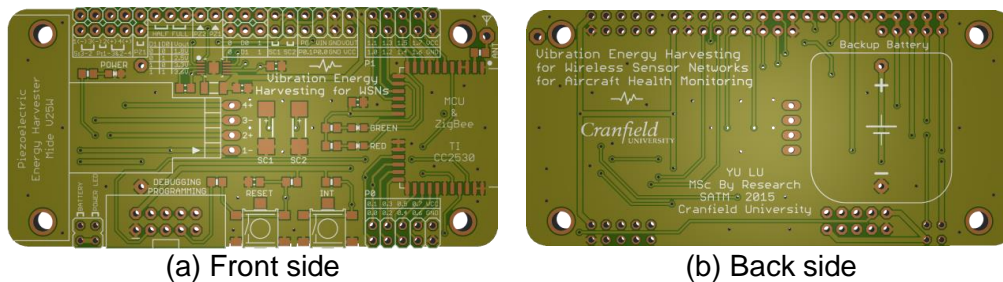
PCB board of the WSN system board based on vibration energy harvesting
